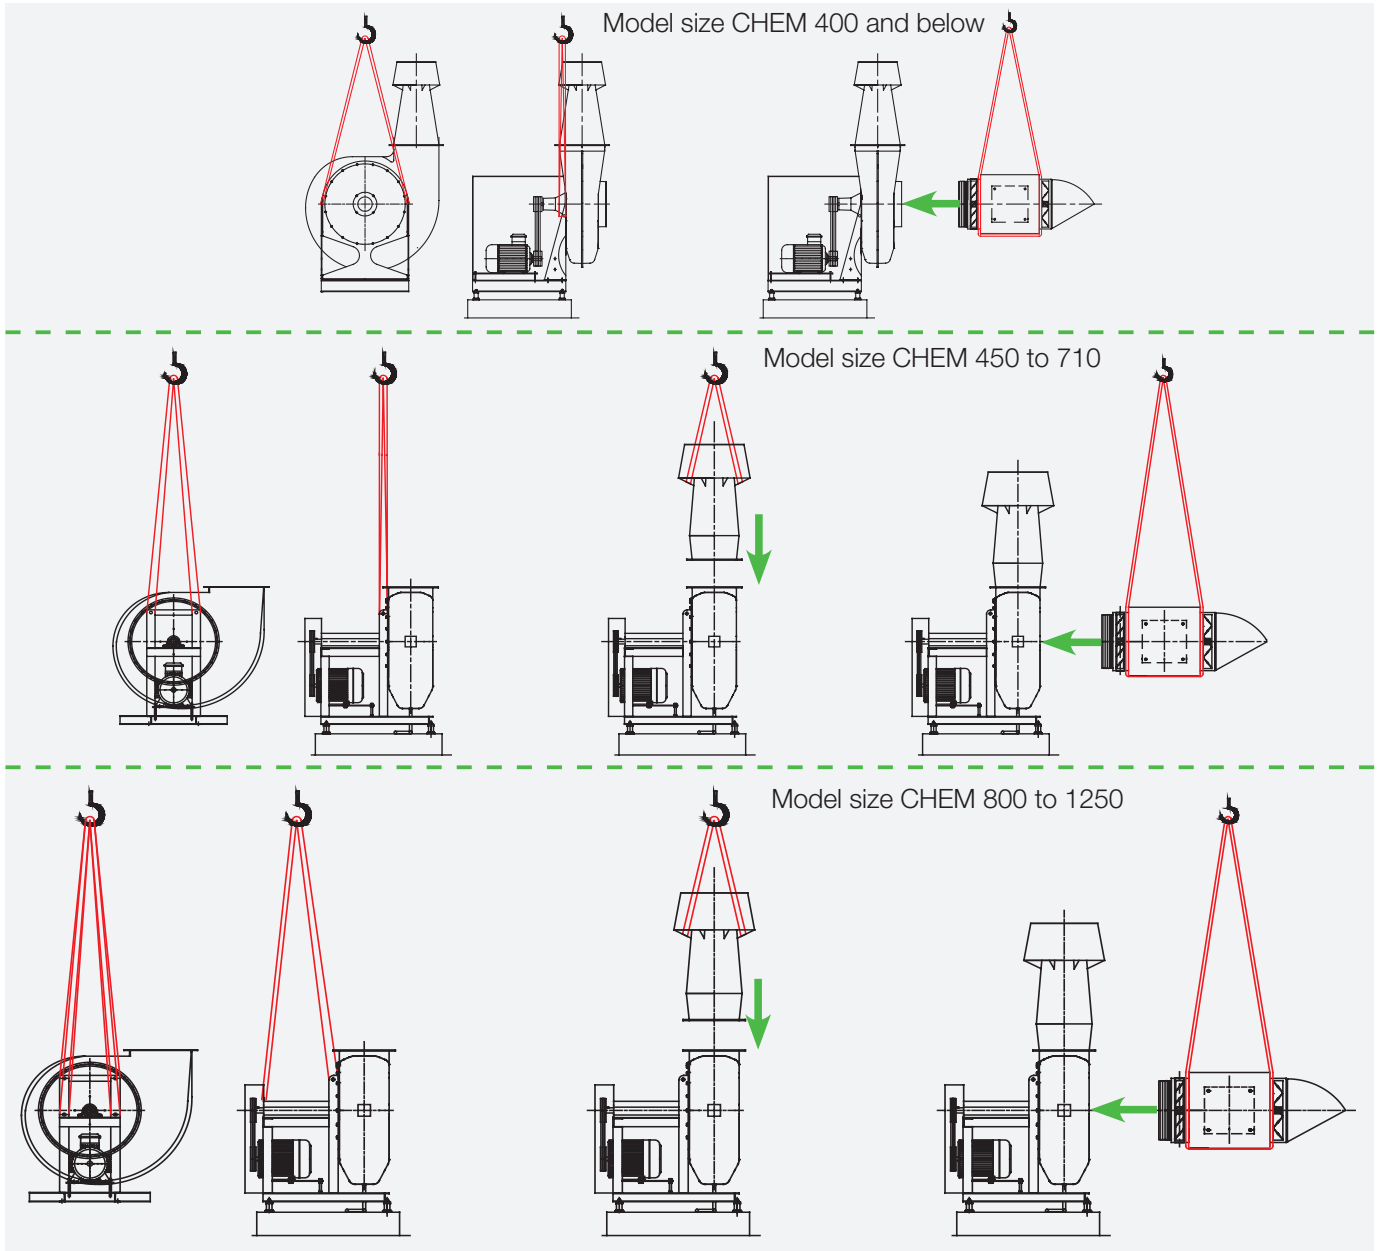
Lifting Using the Mounting Brackets - CHEM Series
